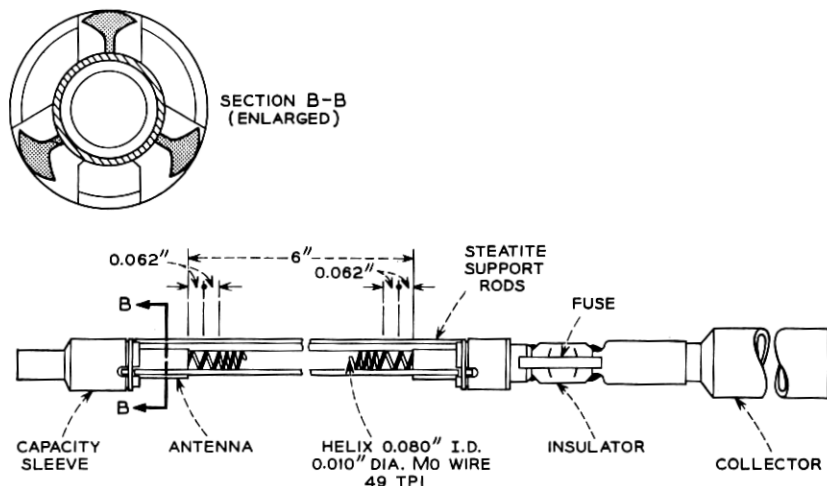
Helix assembly, showing cross section with special undercut F66 ceramic support rods.
